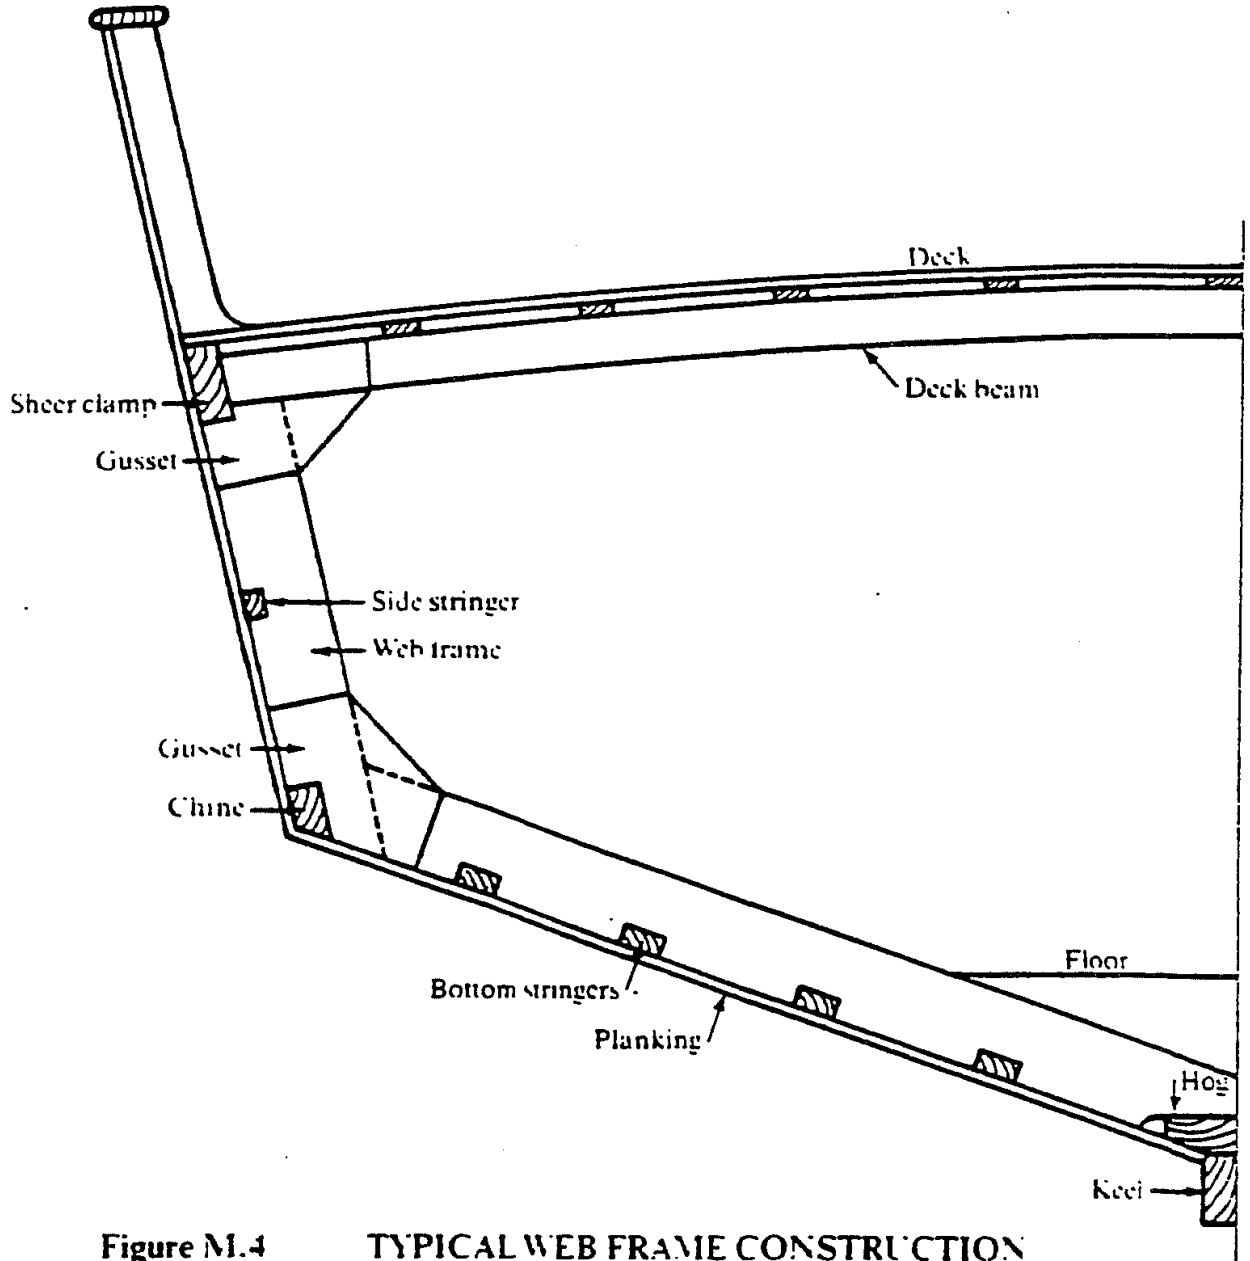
TYPICAL WEB FRAME CONSTRUCTION
